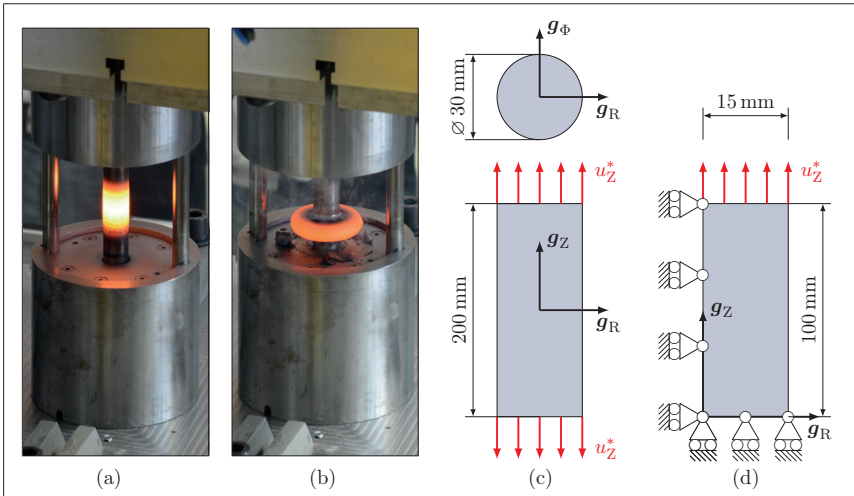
(a) Steel shaft in the reference configuration, (b) Deformed steel shaft, (c) Sketch of the steel shaft and its dimensioning, (d) Axisymmetric model of the steel shaft and its dimensioning
